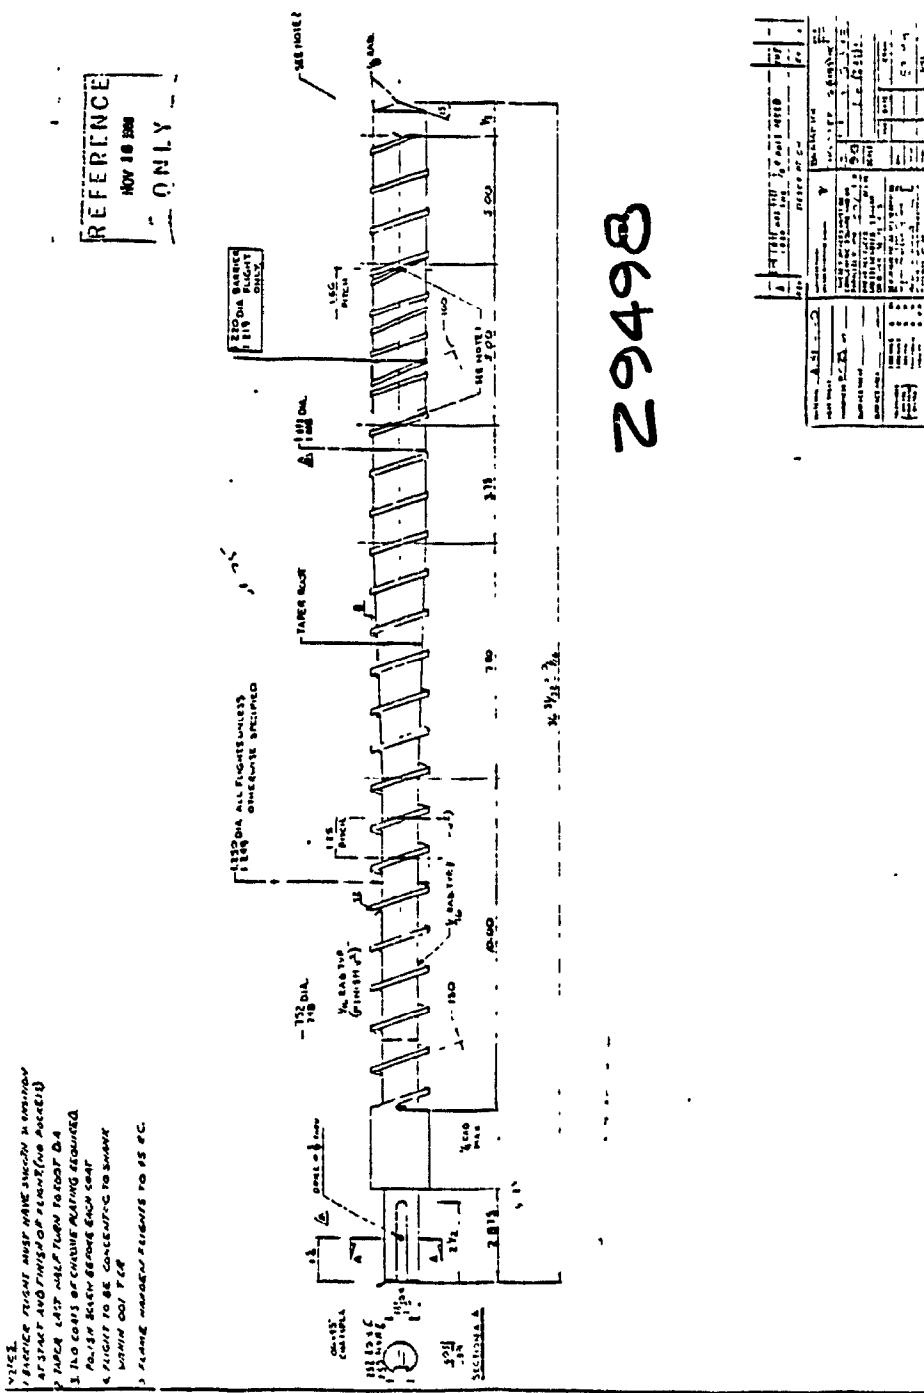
Mixing Screw Design (Brampton Engineering, Inc.).
